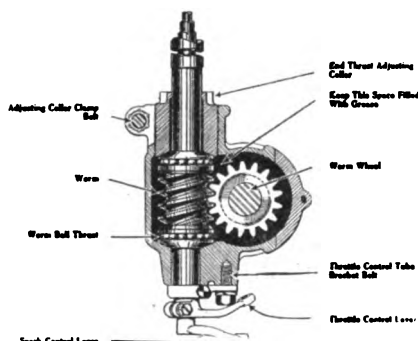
WILL GIVE YOU A CLEARER IDEA OF THE STEERING MECHANISM
